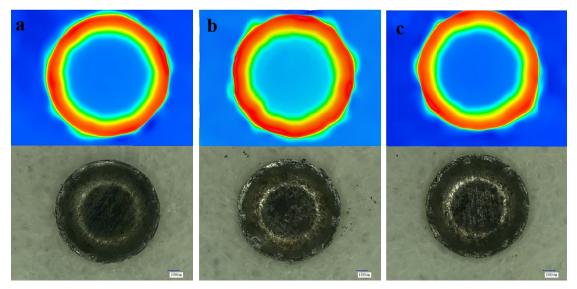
Top height shape of annealed micro-deep drawing cup specimen: (a) 950°C, (b) 1050°C, (c) 1100°C
